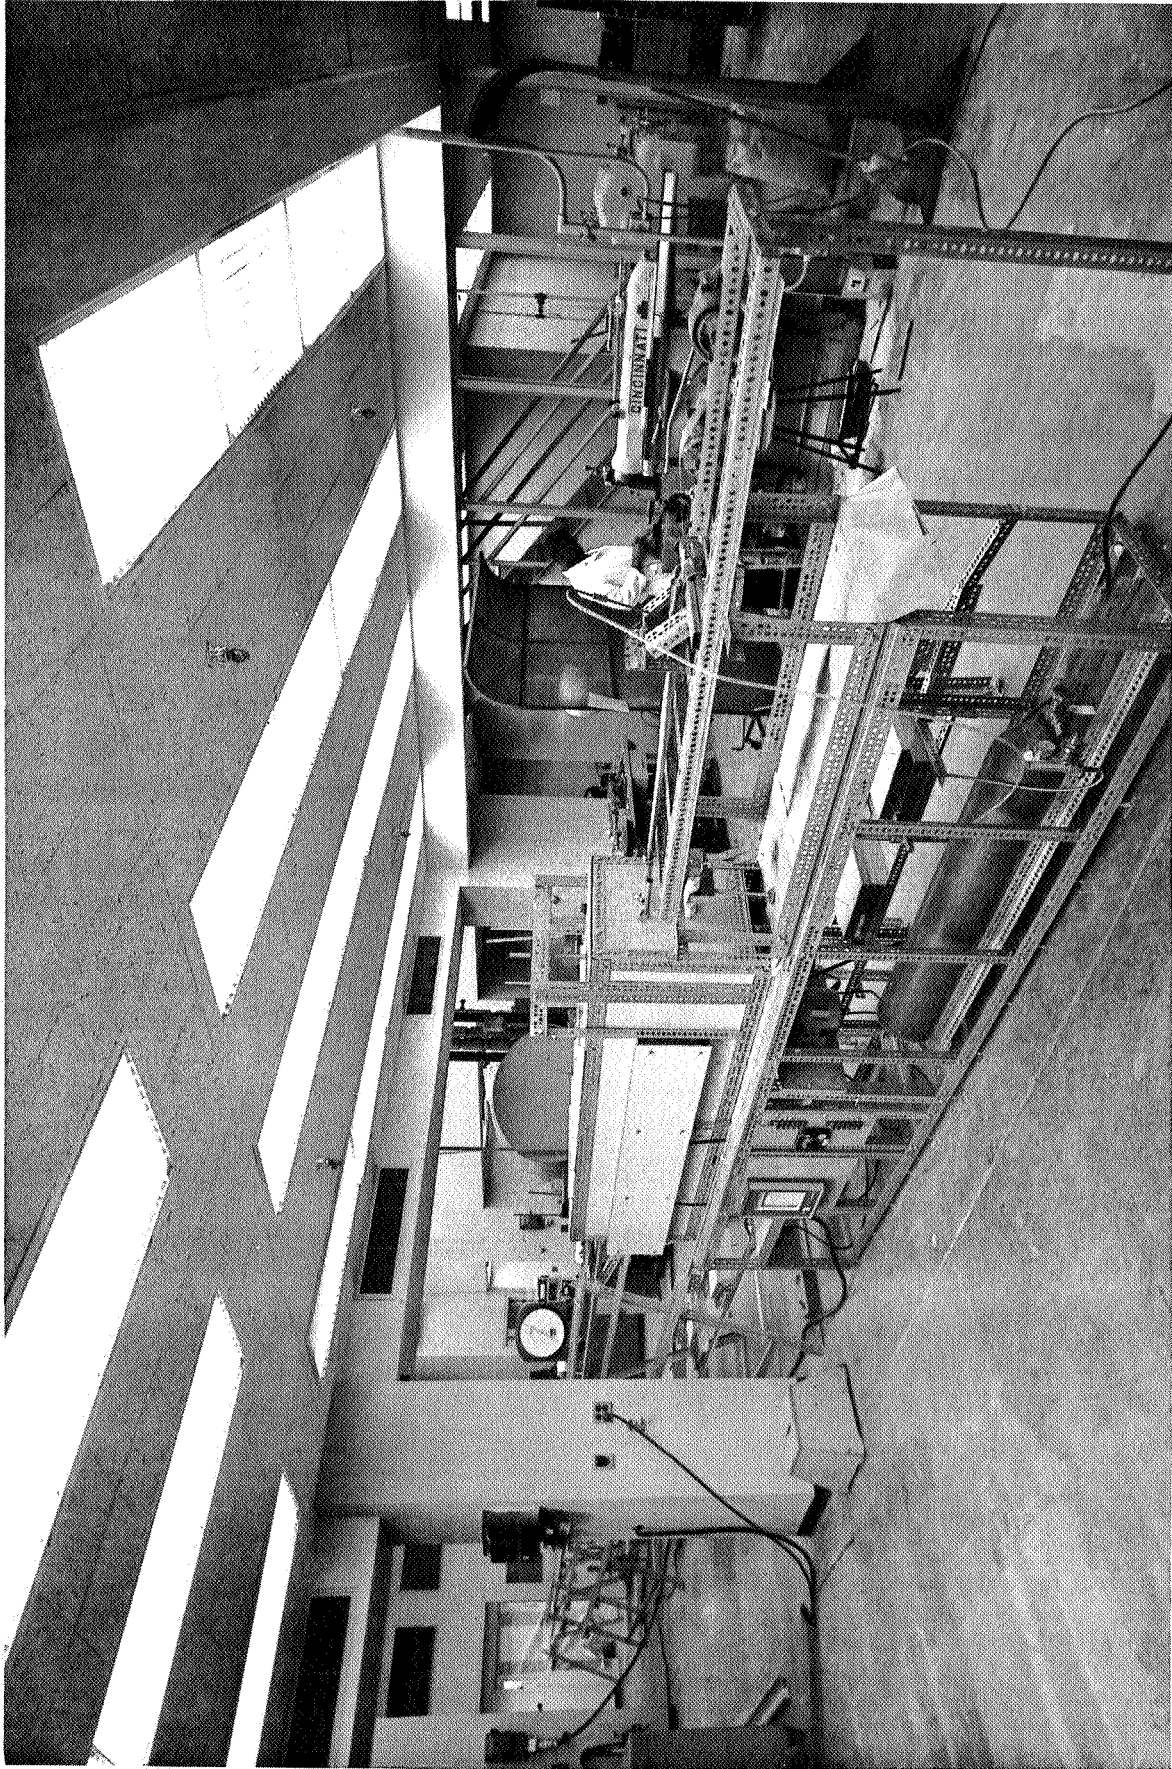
MOD I Continuous Tube Forming Equipment, Overall View
